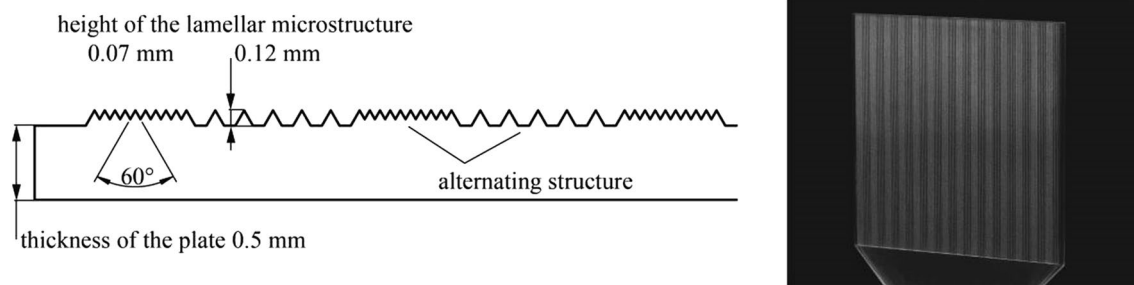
Lamellar structured thin plate (left dimensions of structures and right injection moulded specimen)
